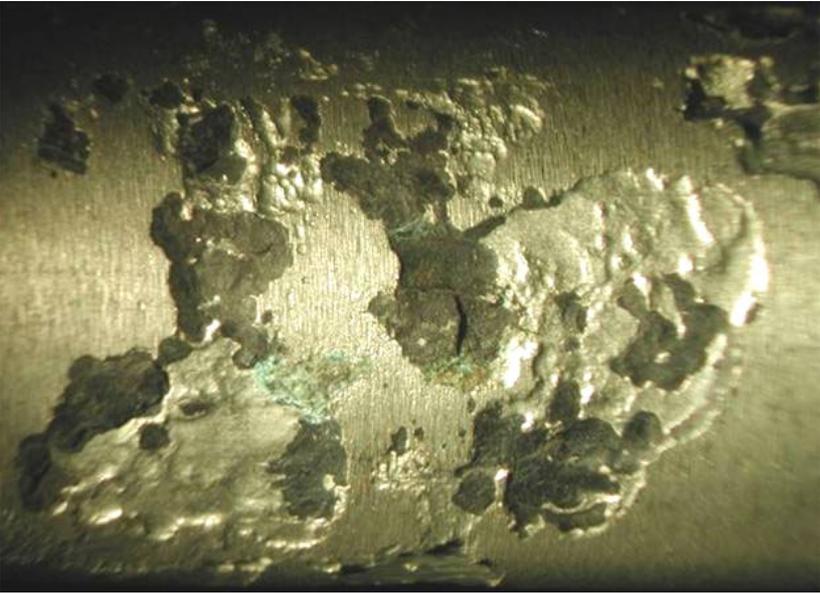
(a). General corrosion on outer diameter — Surface appearance.
